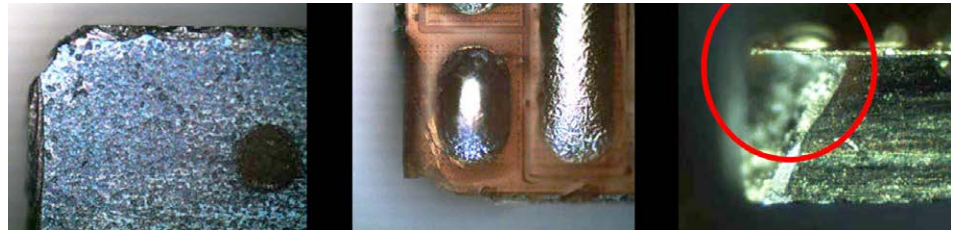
Visual reject part shown in pictures above – EPC1001 part with severe corner chip. Back side chip extends all the way through the chip. Die was still functioning in application. Die is shown post dismount from PCB board.
